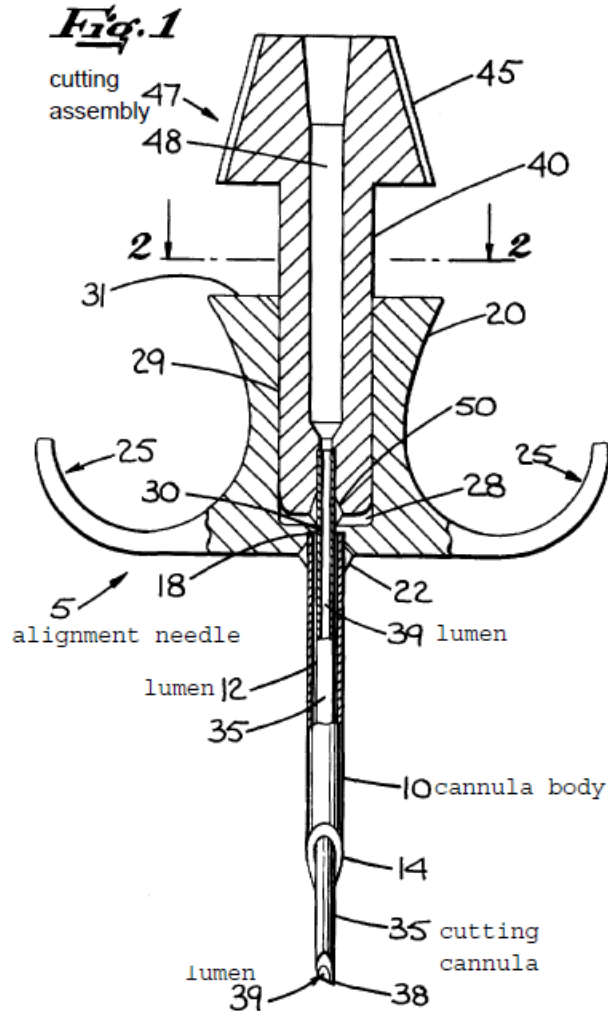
is a partial cross-sectional view of a bone marrow biopsy apparatus comprising alignment needle 5 and cutting assembly 47. Ex. 1006, 2:36–37, 3:17–21, 41–44. Cutting assembly 47 fits axially in bore 28 of alignment needle 5. *Id.* at 3:41–44. Alignment needle 5 includes
